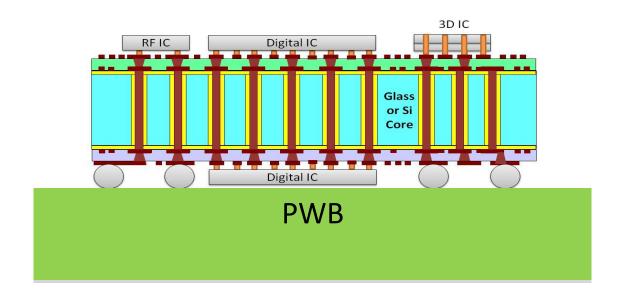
Structure of large 3D package for direct attach to PWB.
